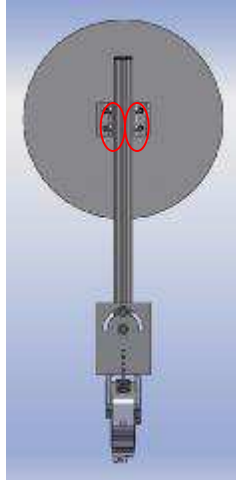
Refasten Actuator Sliding Plate loosening bolts and set screw.
